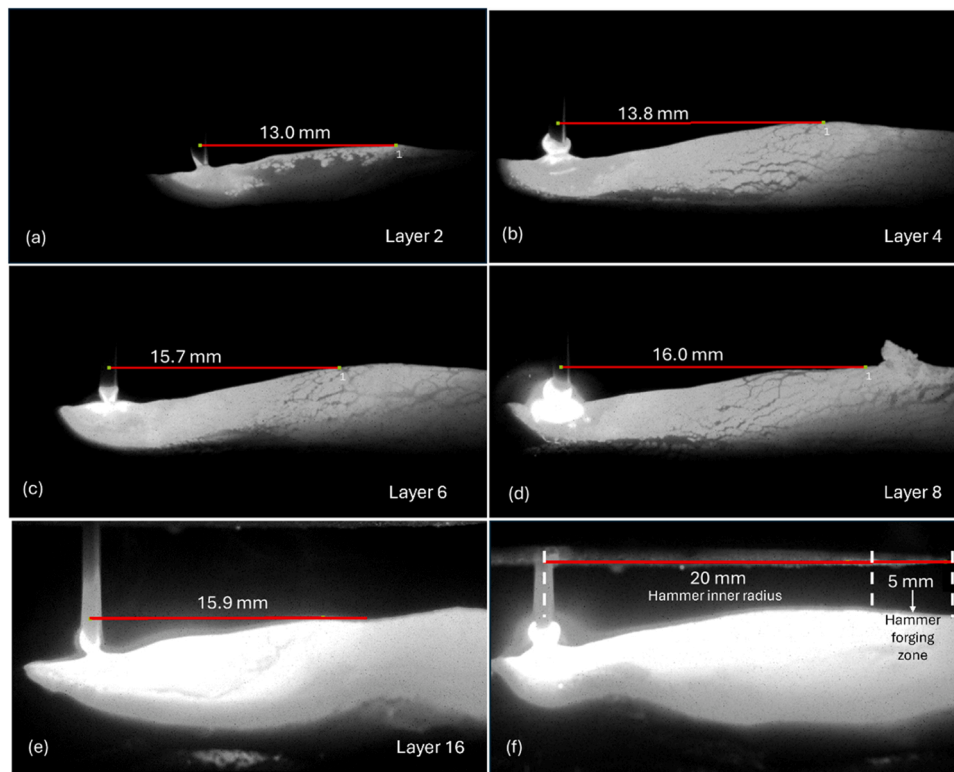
Illustration of the molten pool and its measured length along different layers (a-e), and representation of the hammer fundamental design dimensions. The red line depicts the molten pool length measured from the welding wire.
